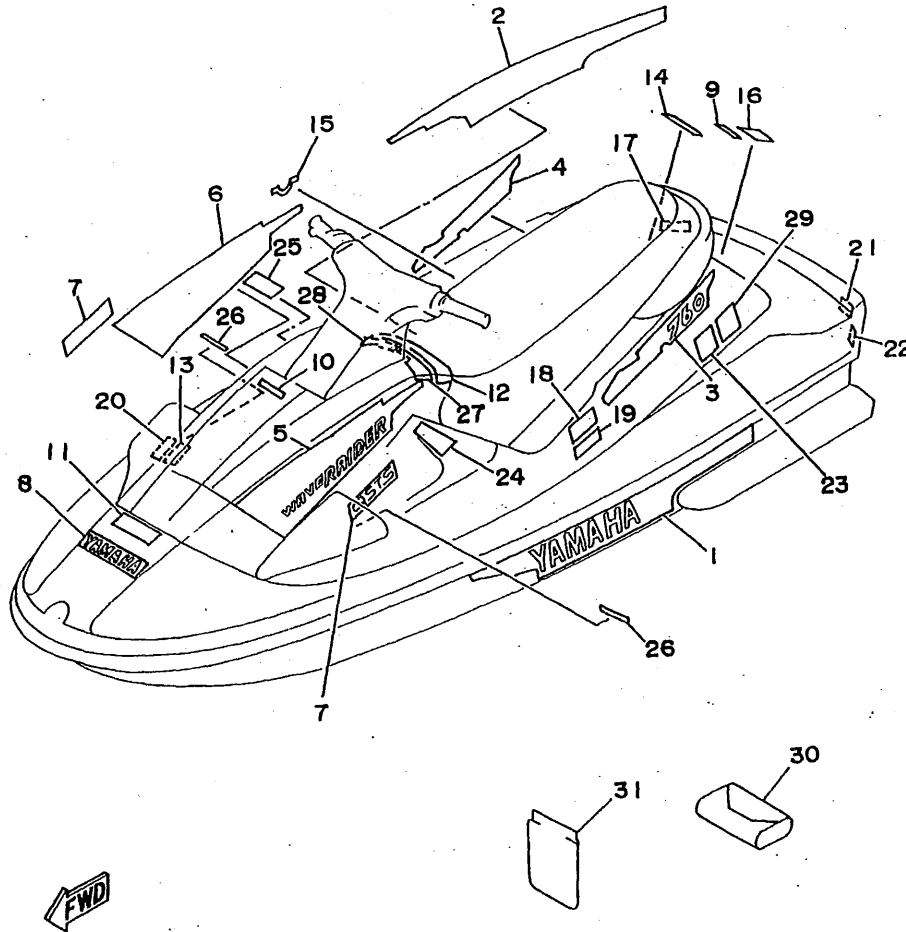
GRAPHIC 1. TOOL (FOR USA)
